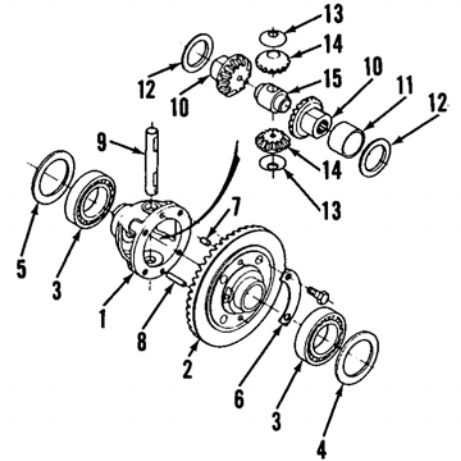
Exploded view of rear axle differential and bevel ring gear typical of all models.
